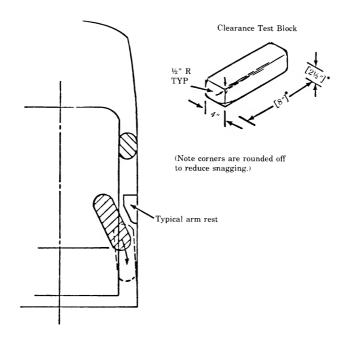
USE OF CLEARANCE TEST BLOCK TO DETERMINE HAND/ARM ACCESS
